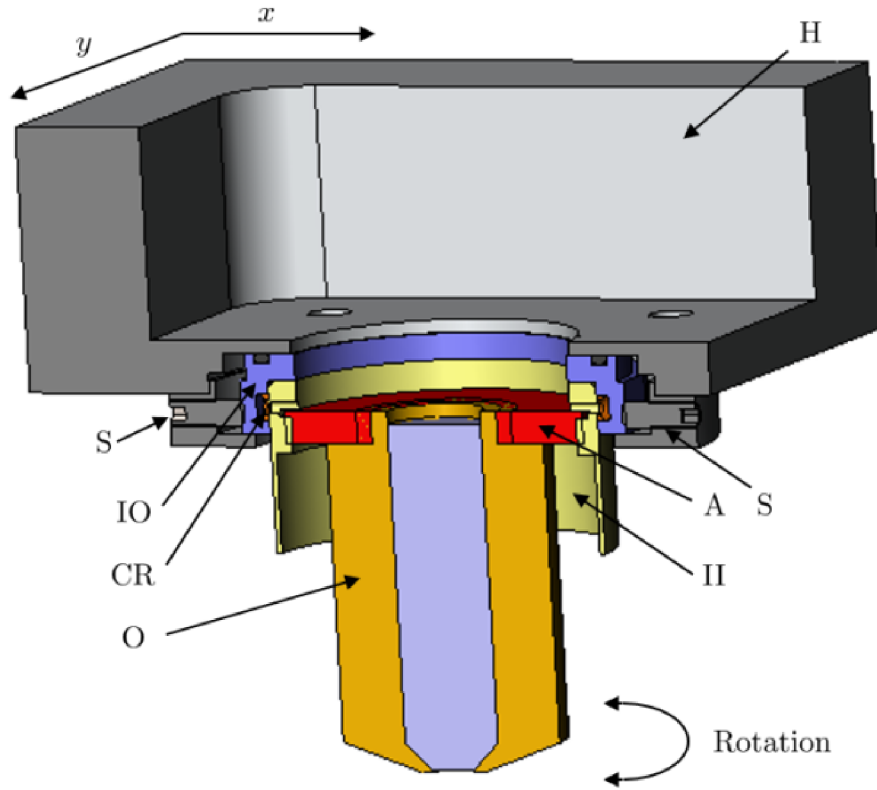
The novel design of the condenser holder, adapted for the microscope objective: (H) original holder, (IO) Insert, outer part, (II) Insert, inner part, (CR) C ring, (A) size adapter, (S) screws, (O) objective.
